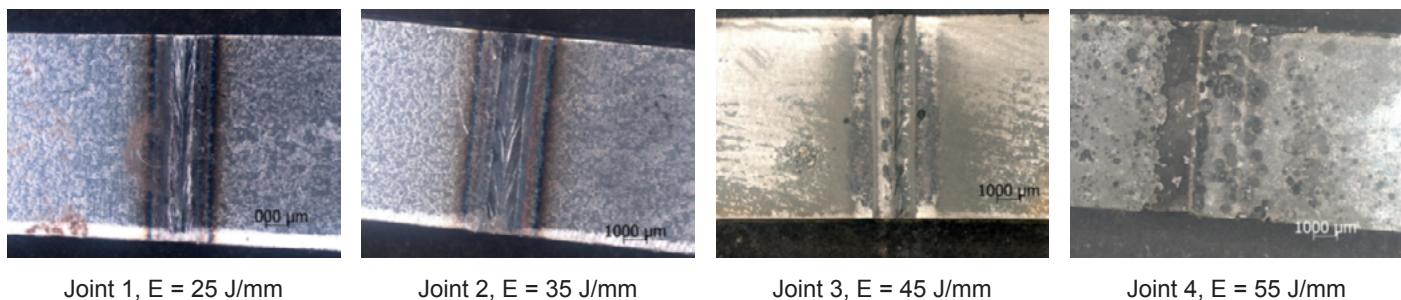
Macrostructure of the welded joints after the corrosion tests
